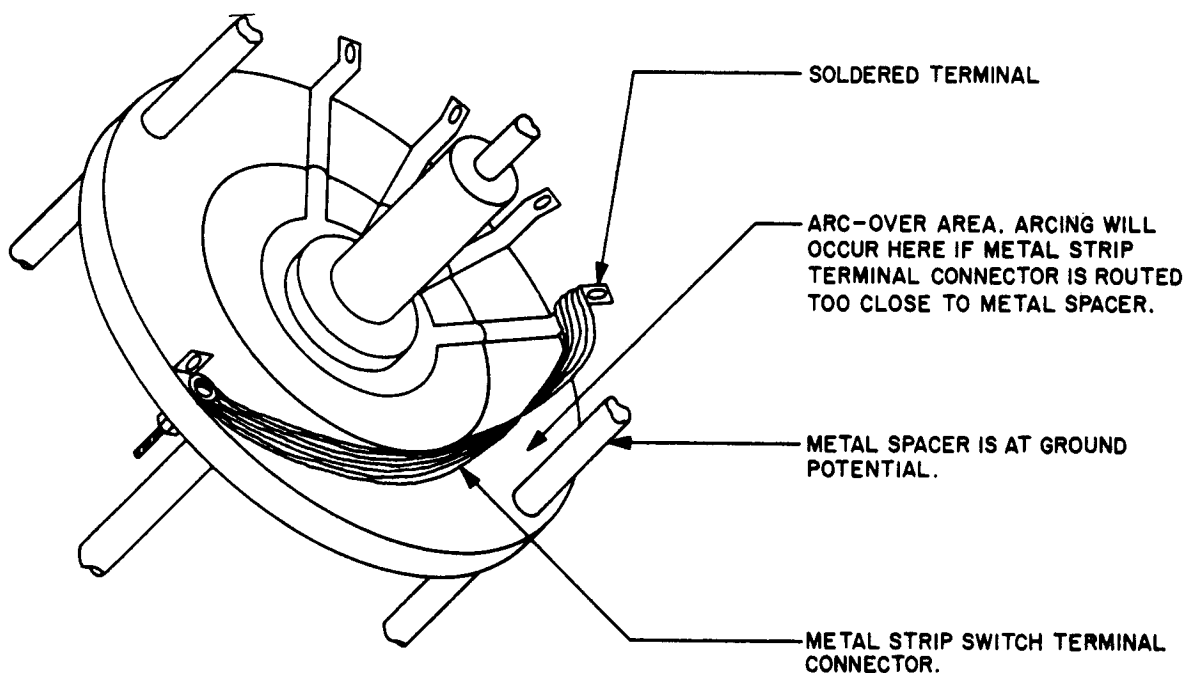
S-6A Section of AM-2061/URT, S-6 and S-5 Switch Assembly
